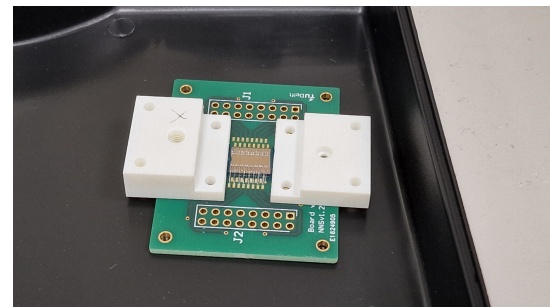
W6R3C06 thruster assembly after wire bonding.
